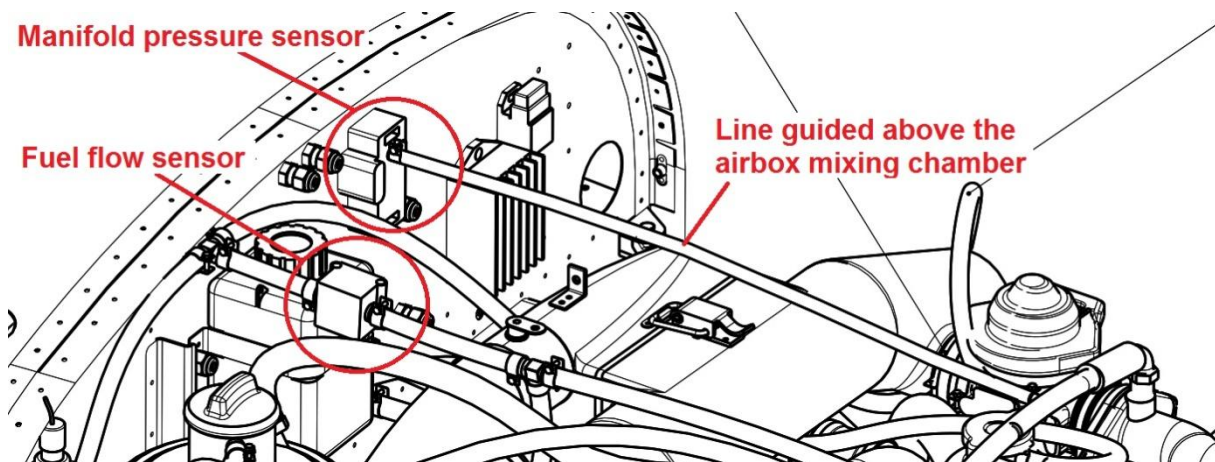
Type design definition of correct manifold pressure sensor and fuel flow sensor
